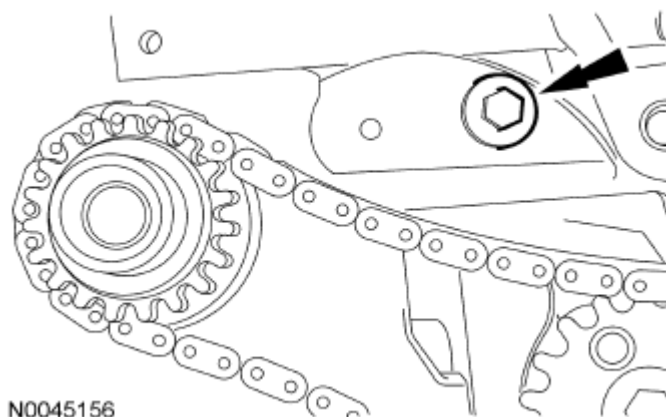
Locating Oil Pump Drive Chain Tensioner Shoulder Bolt
